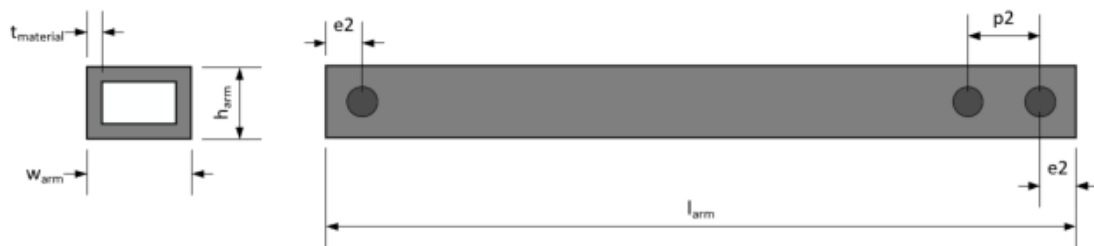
Trailing arm BOM and Piece-part Drawing
